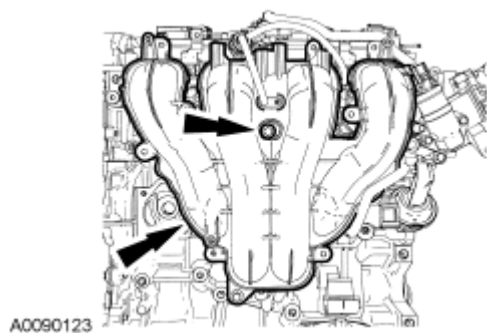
Locating Intake Manifold Gaskets & Intake Manifold
